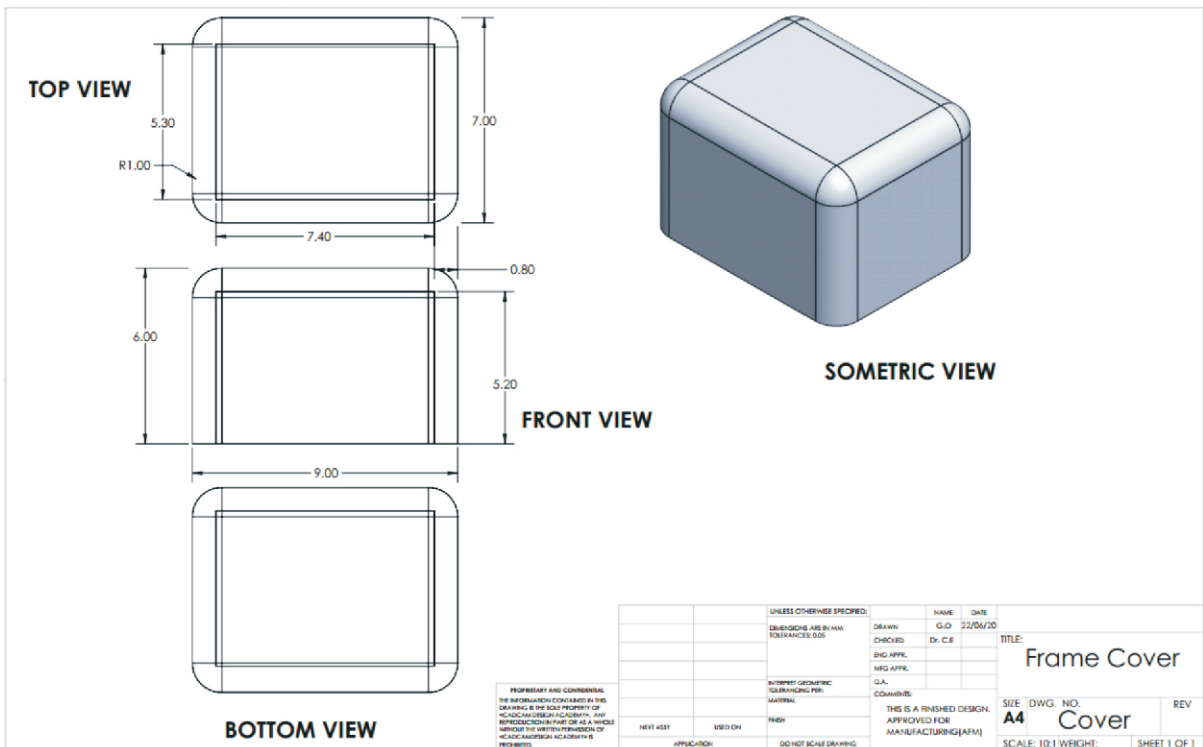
The design of University of Port Harcourt customized Face shield frame cover
